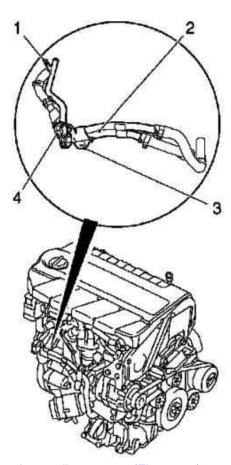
Removing the pipe cooling system: 1 - screw fixing the lower rubber bearing, 2, 3, 4 - Brackets
